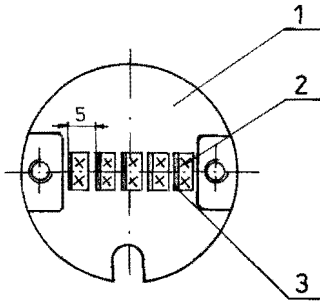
Fuse-link blade contact with arrangement of 5 strips shown. 1-blade contact; 2-fuse-element welding points; 3-fusible strip.
